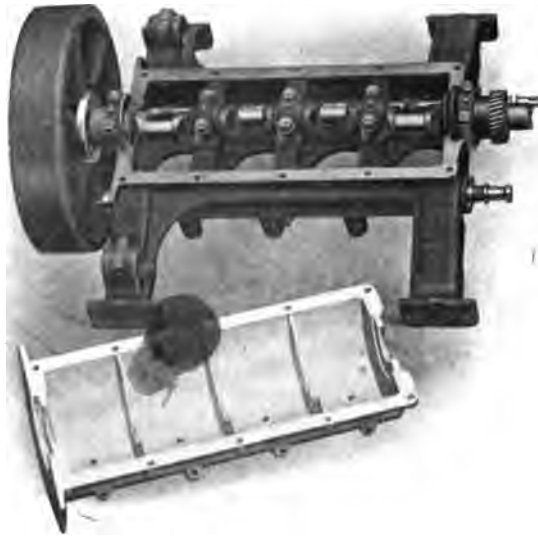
Engine Base, Showing Support Piece Separate from Crank-Case, as Formerly Used by Premier Motor Manufacturing Company, Indianapolis, Ind. Case and Support are Now Made Integral.
